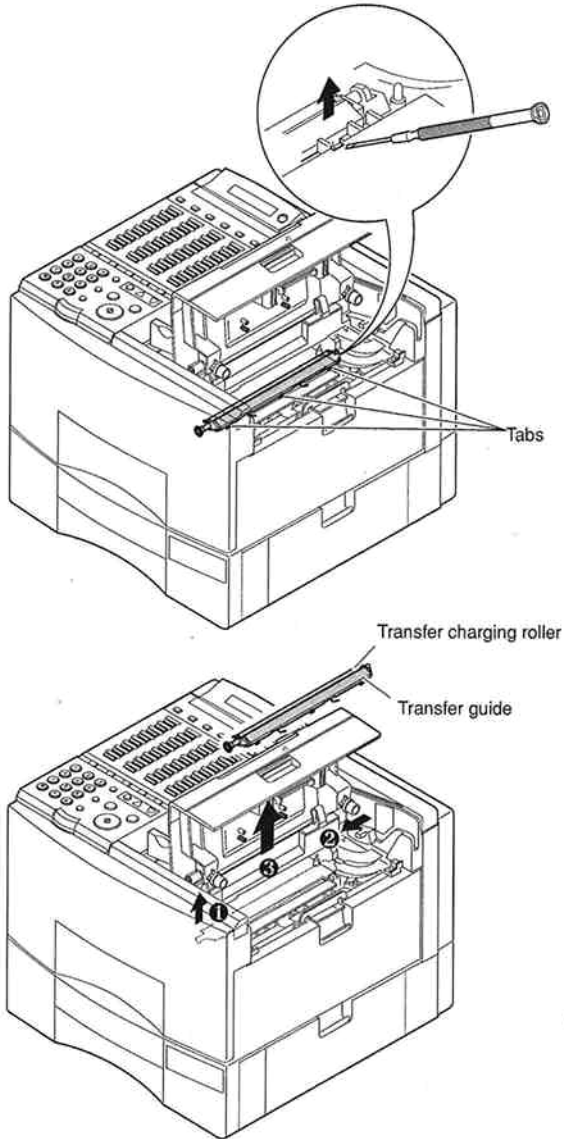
Disassembly Procedure (Transfer Charging Roller)
